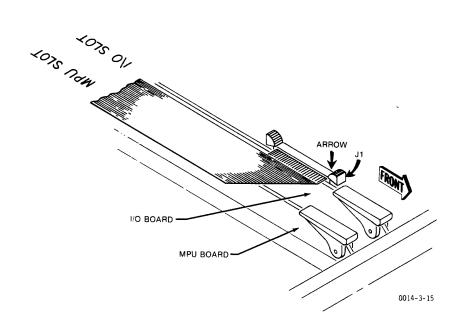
Disk Drive Ribbon Cable Connection to I/O Board
